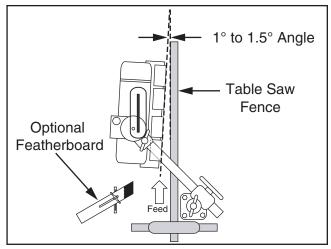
Example of power feeder toe-in on a table saw (4-roller model shown).
